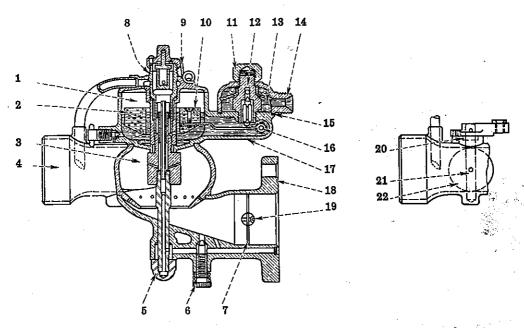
Illustration No. 64—Carburetor, Model "R," 11" (17945D) (sectional view).
